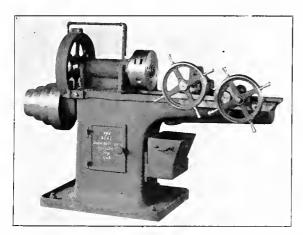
Single Bolt Cutter. Acme Machinery Co.
